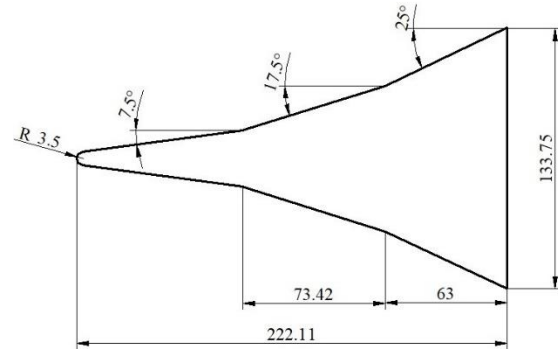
Geometry of Triple ramp (dimensions are in mm)
